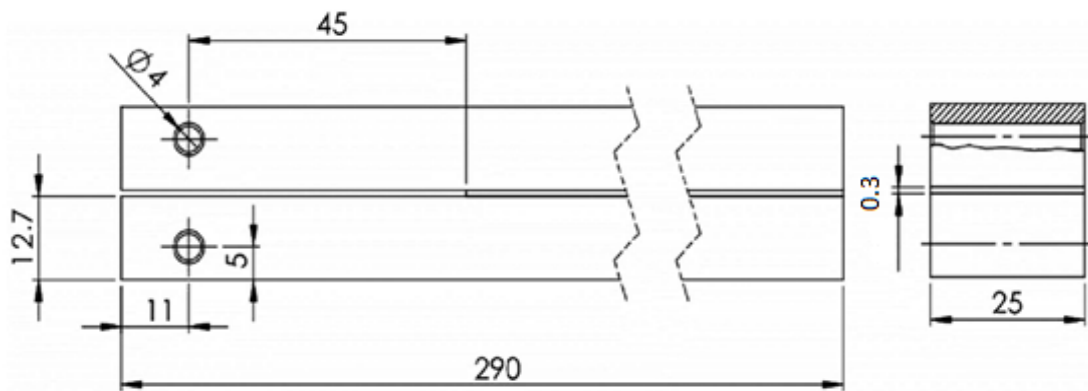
Specimens geometry according to ASTM D-3433-99 (dimensions in millimeters) adapted from [16]
